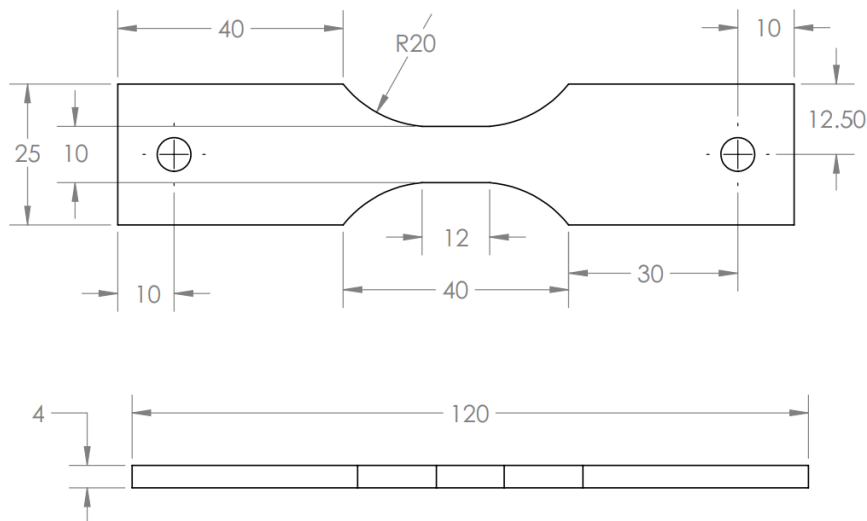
Dimensions of the specimens used for the fatigue and tensile tests. All dimensions are in mm.
